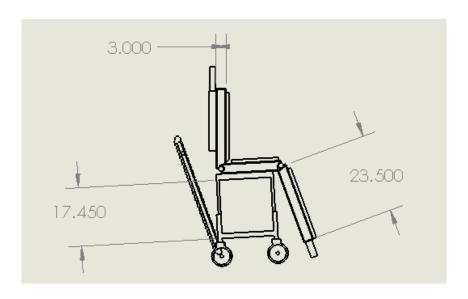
Preliminary Design - Side View with Hidden Lines Removed
